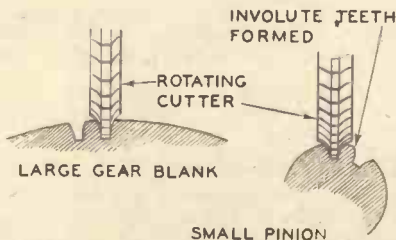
A simple method of cutting gear teeth by means of a rotating cutter with a tooth edge, carried on the arbor of a milling machine. Note the different shape of cutter when dealing with small and large wheels
